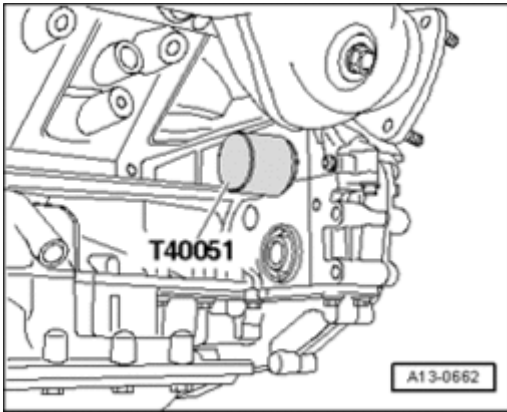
Driving In Sealing Ring For A/C Compressor Drive Using Thrust Piece T40051
